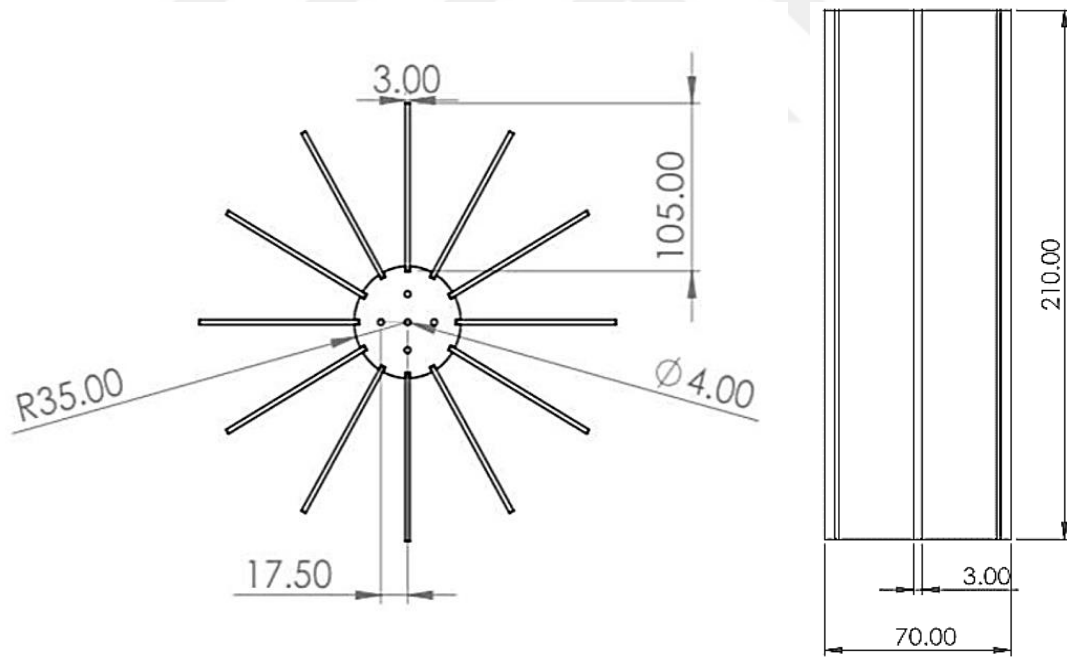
The drawing of the base cylinder (all dimensions in mm).
